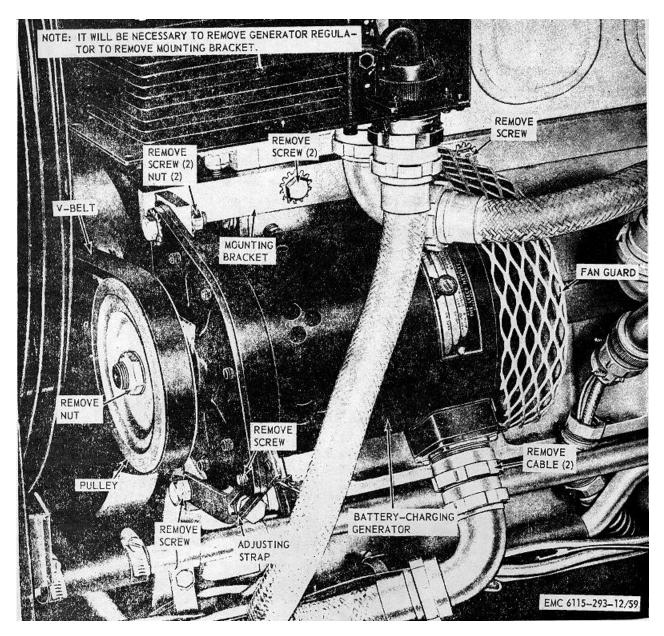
Generator, pulley, fan guard, adjusting strap, and bracket, removal, disassembly, reassembly, and installation.
